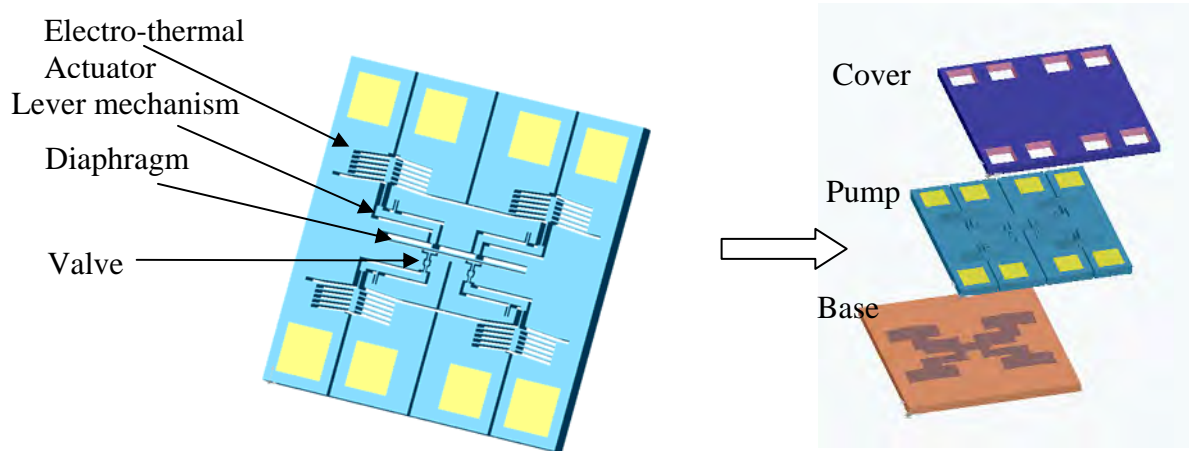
In-plane micropump. (a) An exploded view of a 3-layer design. (b) A micropump that has actuator, diaphragm and valves on a single die
